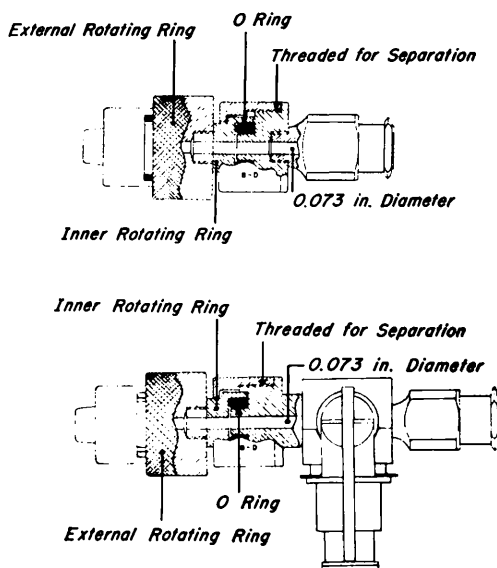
Cross-section blueprints of rotating adapter and rotating adapter stopcock unit.
